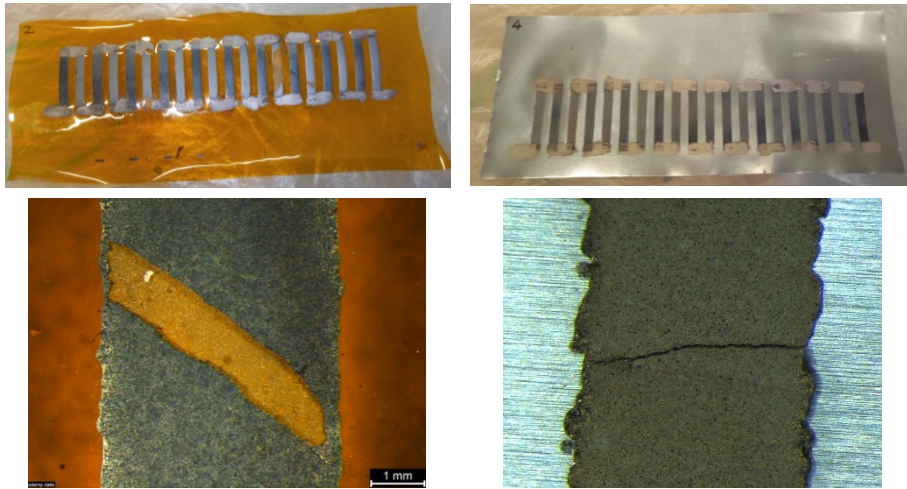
KIT TEG printed on Kapton (left) and on aluminum oxide (right). Below, examples of fracture are shown.
